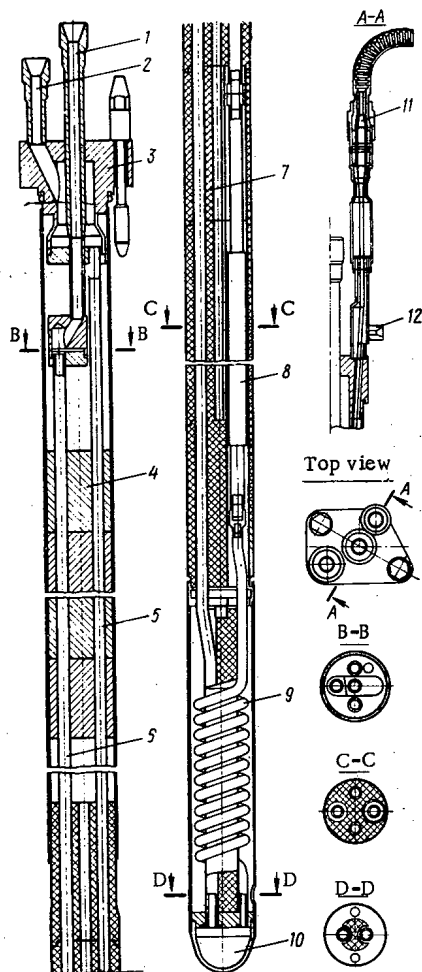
Experimental double fuel element channel: 1, 2) inlet and outlet pipes for coolant of the first loop; 3) channel head; 4) steel sleeves; 5, 6) descending and ascending tubes; 7) graphite sleeves; 8) fuel element; 9) compensator; 10) rotary chamber; 11) thermocouple outlet assembly; 12) pressure bleeder pipe.
